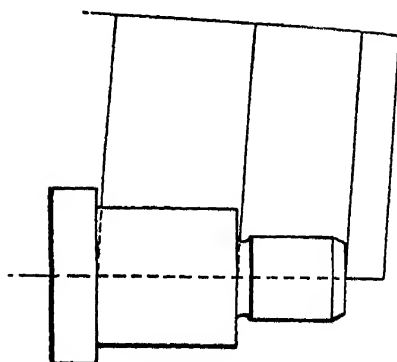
SHOWING HOW A TOOL MAY BE INCLINED TO ONE SIDE TO PREVENT BINDING
